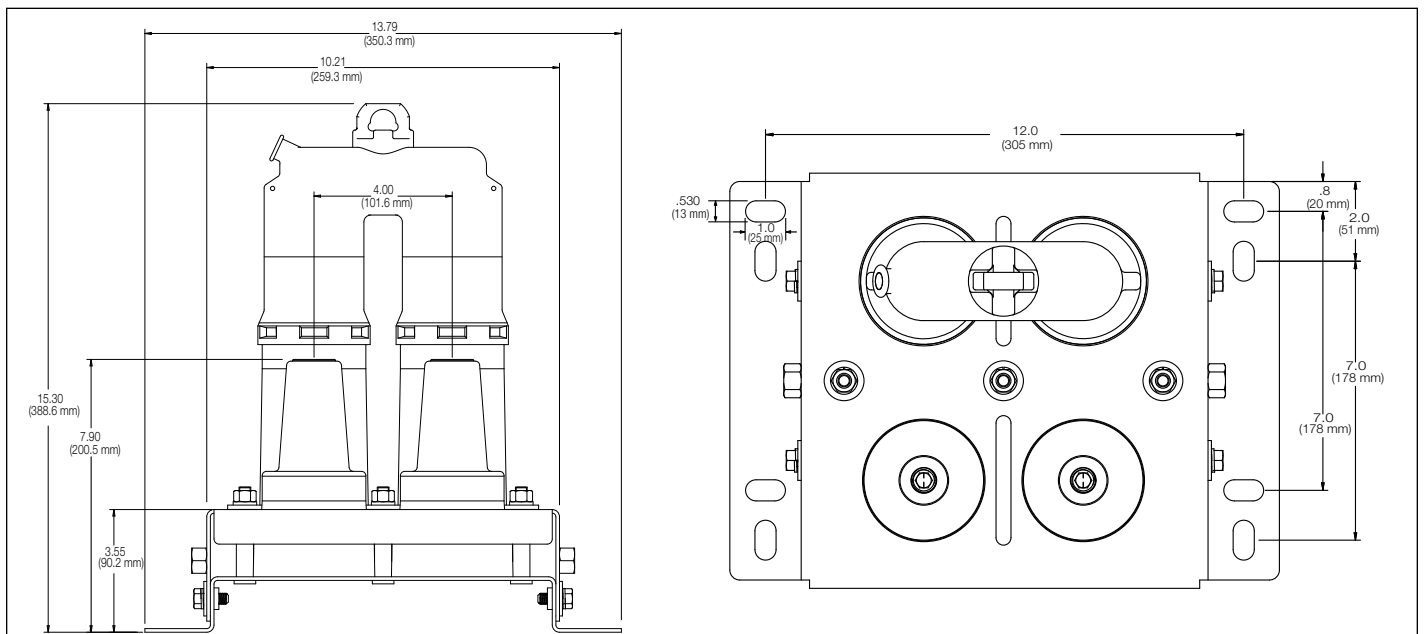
Dimensional drawing shows mounting configurations for square bracket.
